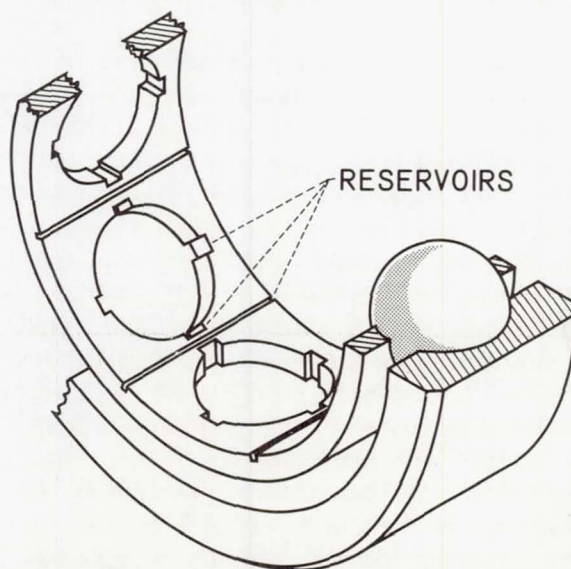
Ball-bearing retainer with solid lubricant reservoirs.
